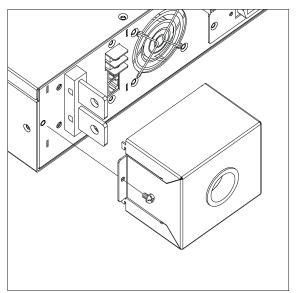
Assembling the Rear Safety Cover of 62006P, 62012P & 62024P
